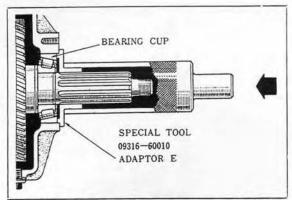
Installing the cup of rear tapered roller bearing in the transfer case with special tool.
